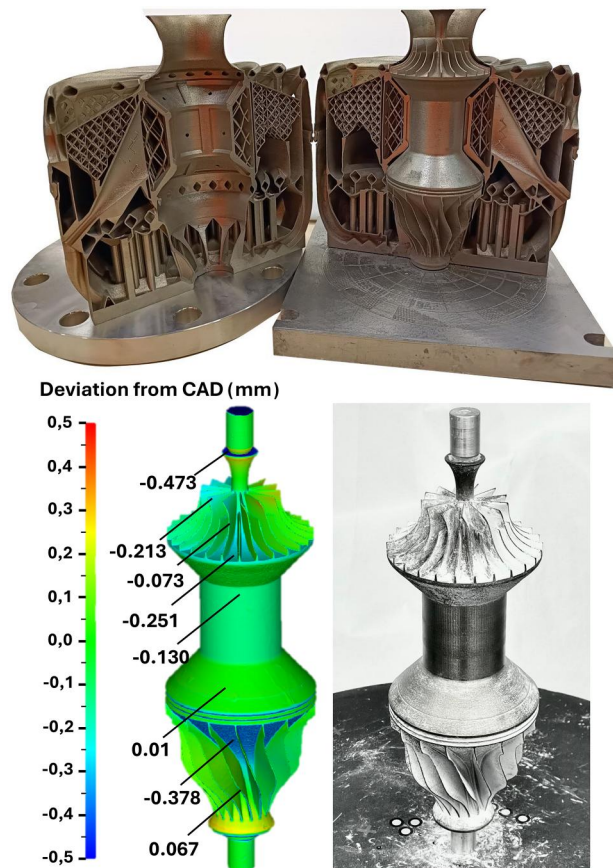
Additively manufactured pre-assembled micro gas turbine engine fabrication technology demonstrator (top) and deviation of the rotor from the nominal CAD geometry (bottom)
